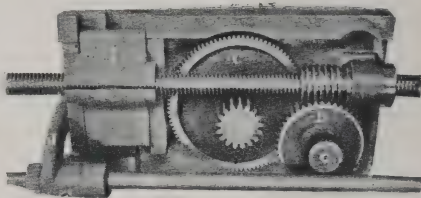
INTERIOR OF APRON, FITTED TO SLIDING AND SCREW-CUTTING LATHE (HENDEY-NORTON).
